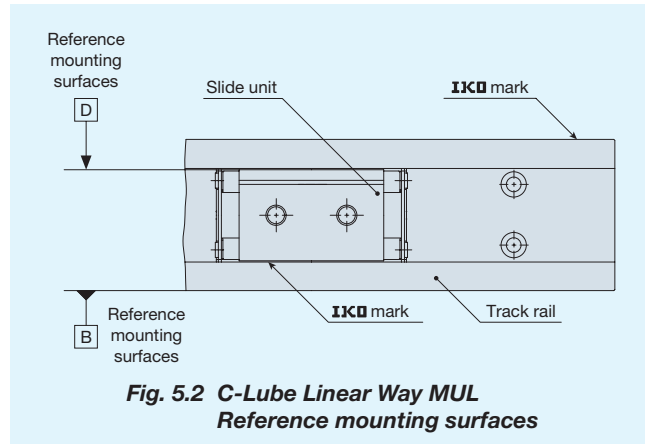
C-Lube Linear Way MUL Reference mounting surfaces
